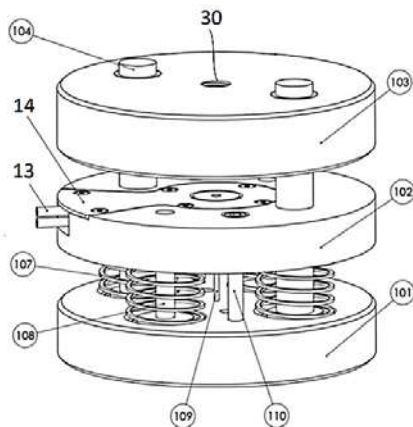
shows a perspective view of the micro-deep drawing apparatus.
